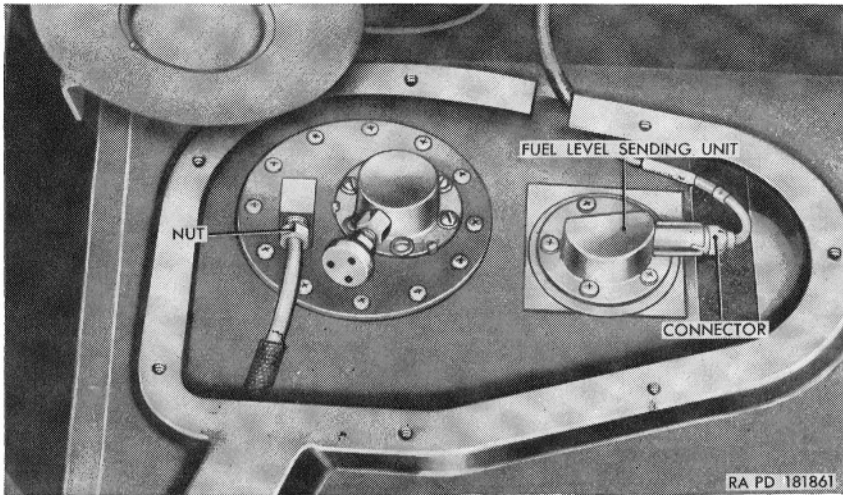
Fuel tank, fuel filter, and fuel level sending unit M170—installed—driver's seat and fuel tank units access plate—removed.
